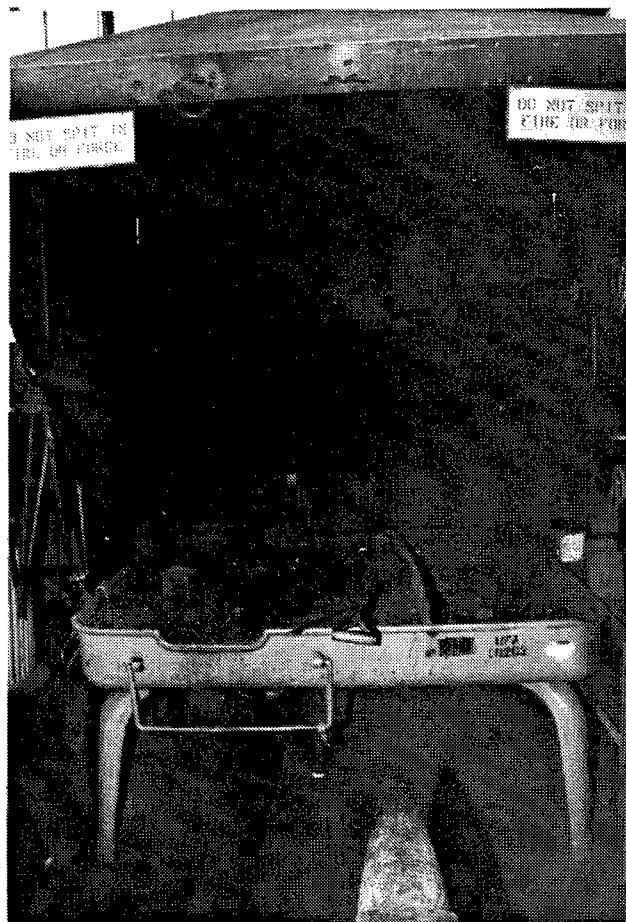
Building 520: Interior view of the Weld Shop showing a forge manufactured by Champion Blower and Forge Company.
